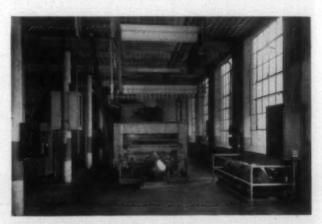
Output end of variable voltage sectional motor drive of cloth finishing machine showing last motor and motor generator set with control.
